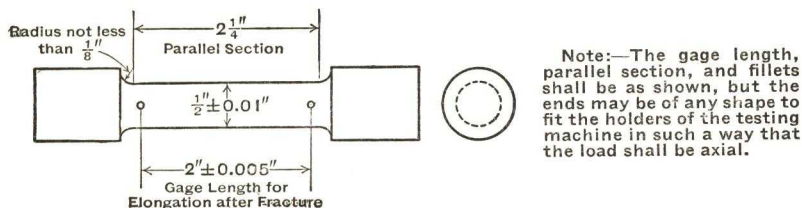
Standard 2-in. Gage Length Tension Test Specimen.
